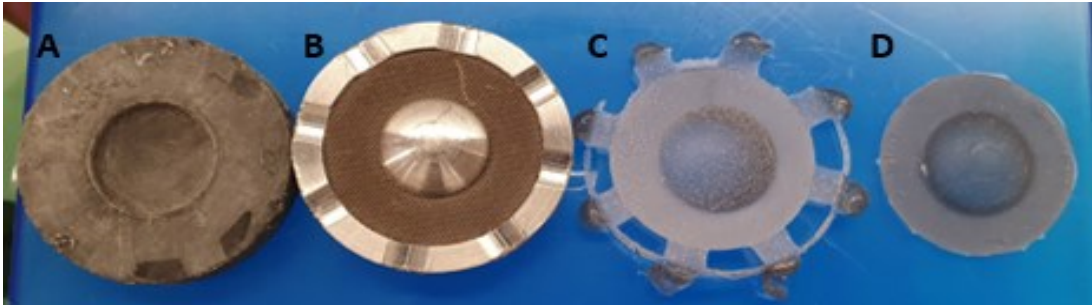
Image showing parts that make up the mold to produce the silicone hemi-lenses. The mixed and degassed silicone is inserted between the two pieces of the mold forming a sandwich. The upper piece is printed in PA (A) and the lower is made of stainless steel with the micropattern textured in the ring surrounding the central convexity (B). Once the silicone is cured (C) it is removed from the mold and the leftover silicone that has come out of the channels of the lower mold is cut to form the final hemi-lens (D).
